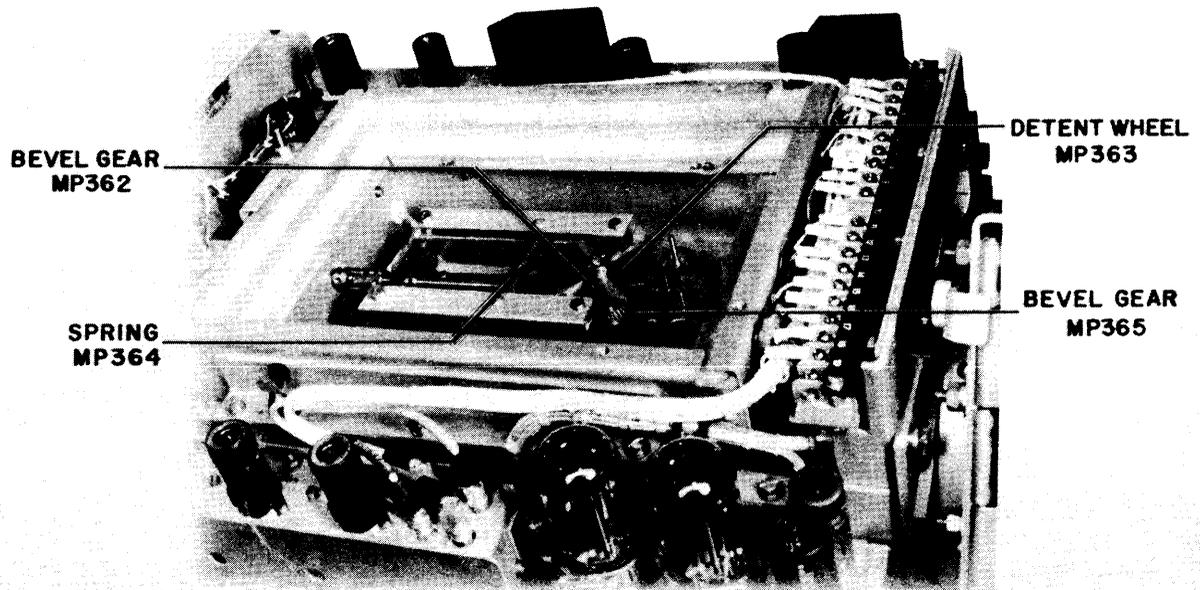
A. Radio Frequency Oscillator O-581/WRT-2, Oven Gear Train Disassembly, Sets Serials 107 and up
